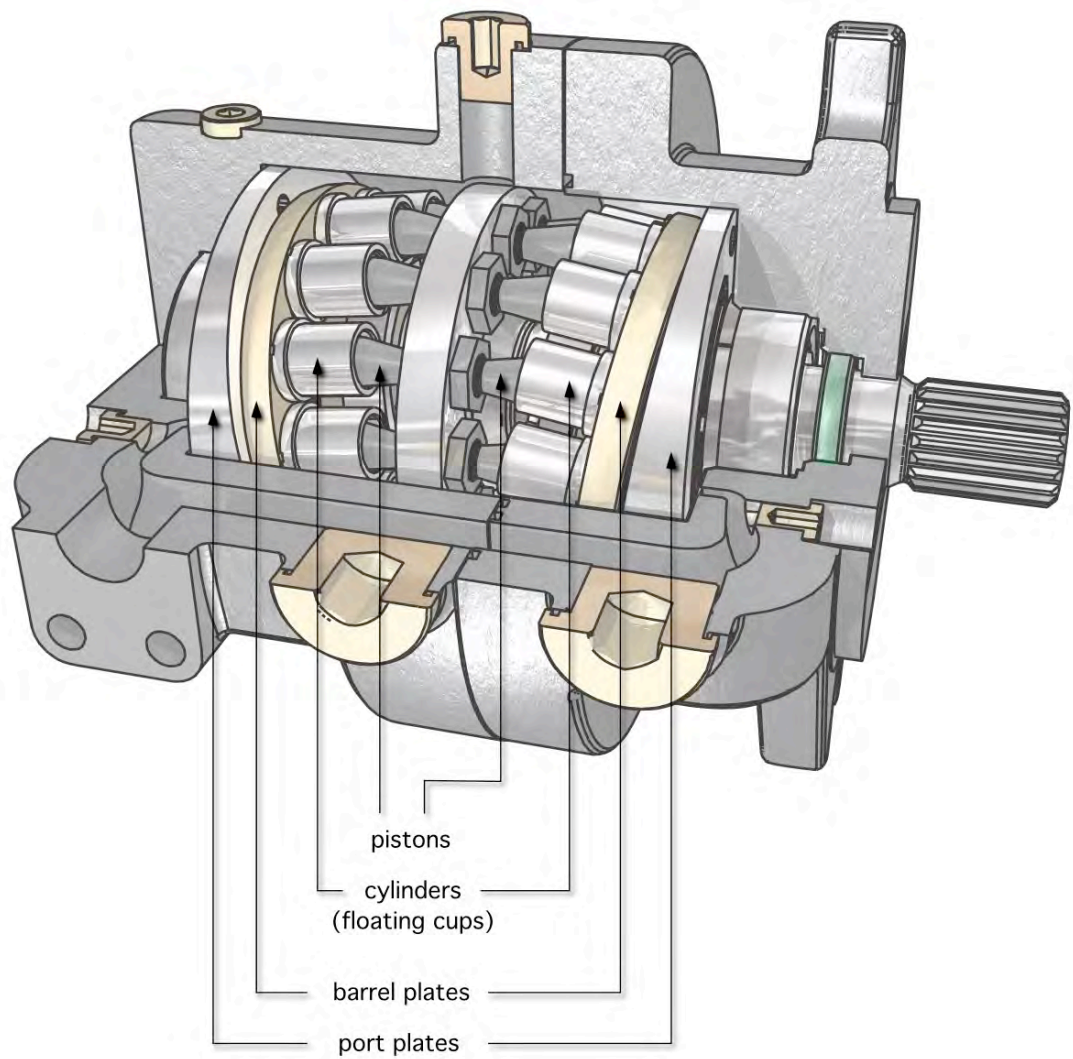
Cut-away view of the first prototype of a floating cup pump
